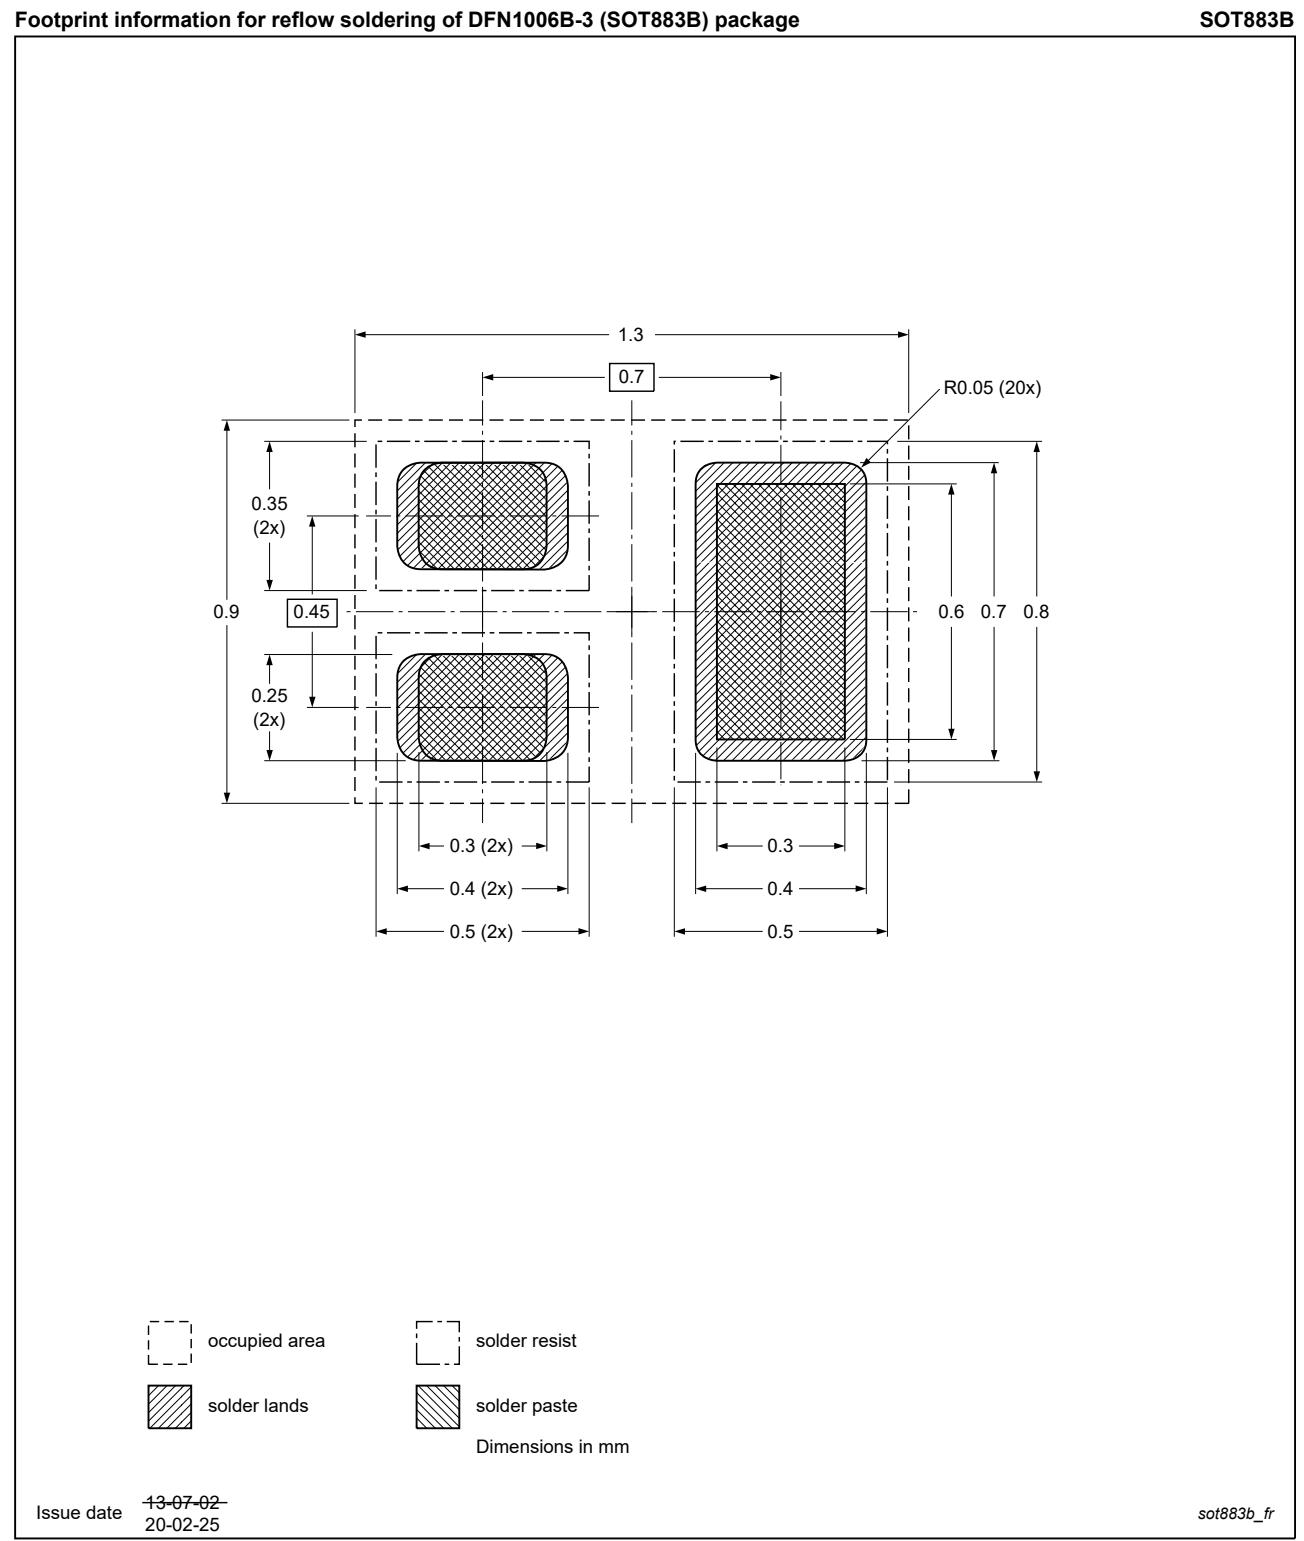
Reflow soldering footprint for DFN1006B-3 (SOT883B)
